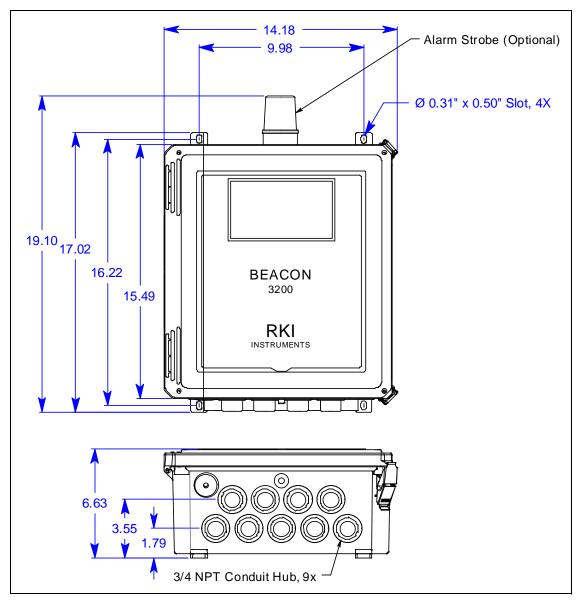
Outline and Mounting Dimensions with 51-0001 Series Alarm Strobe Installed
